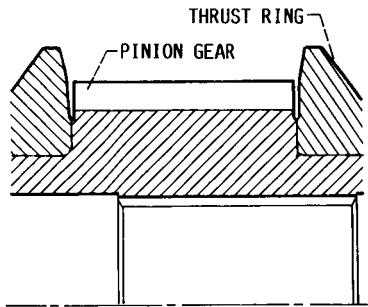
HELICAL GEAR WITH THRUST RINGS.
